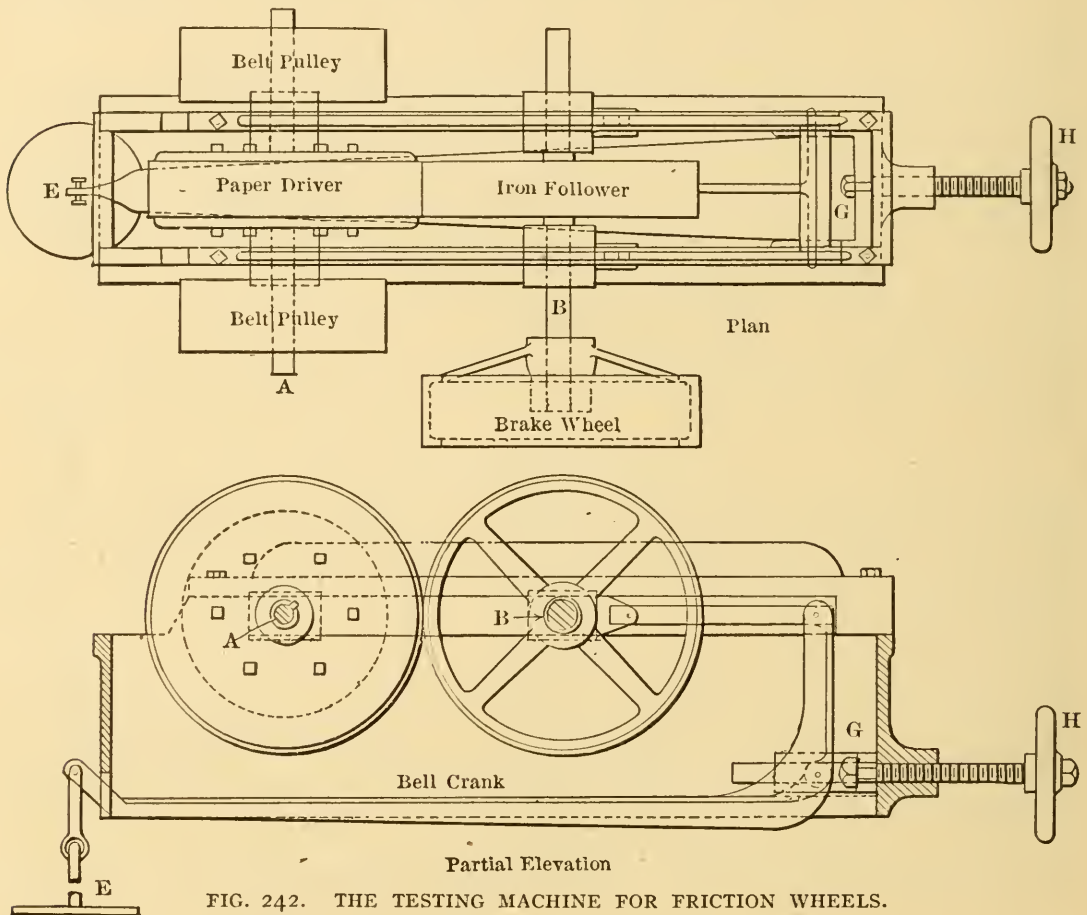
THE TESTING MACHINE FOR FRICTION WHEELS.
